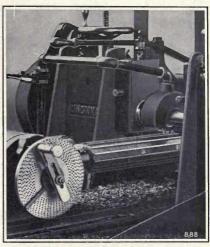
Semiautomatic Miller Machinery steel cutter standard slotting type with sharp corners. 5' diameter, 325' cutting speed. Feed 112' per minute.
